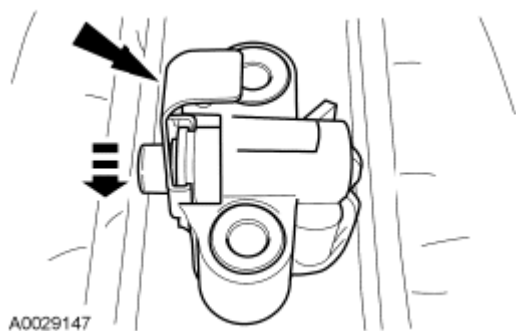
Installing Hydraulic Chain Tensioner Retaining Clip On Tensioner
